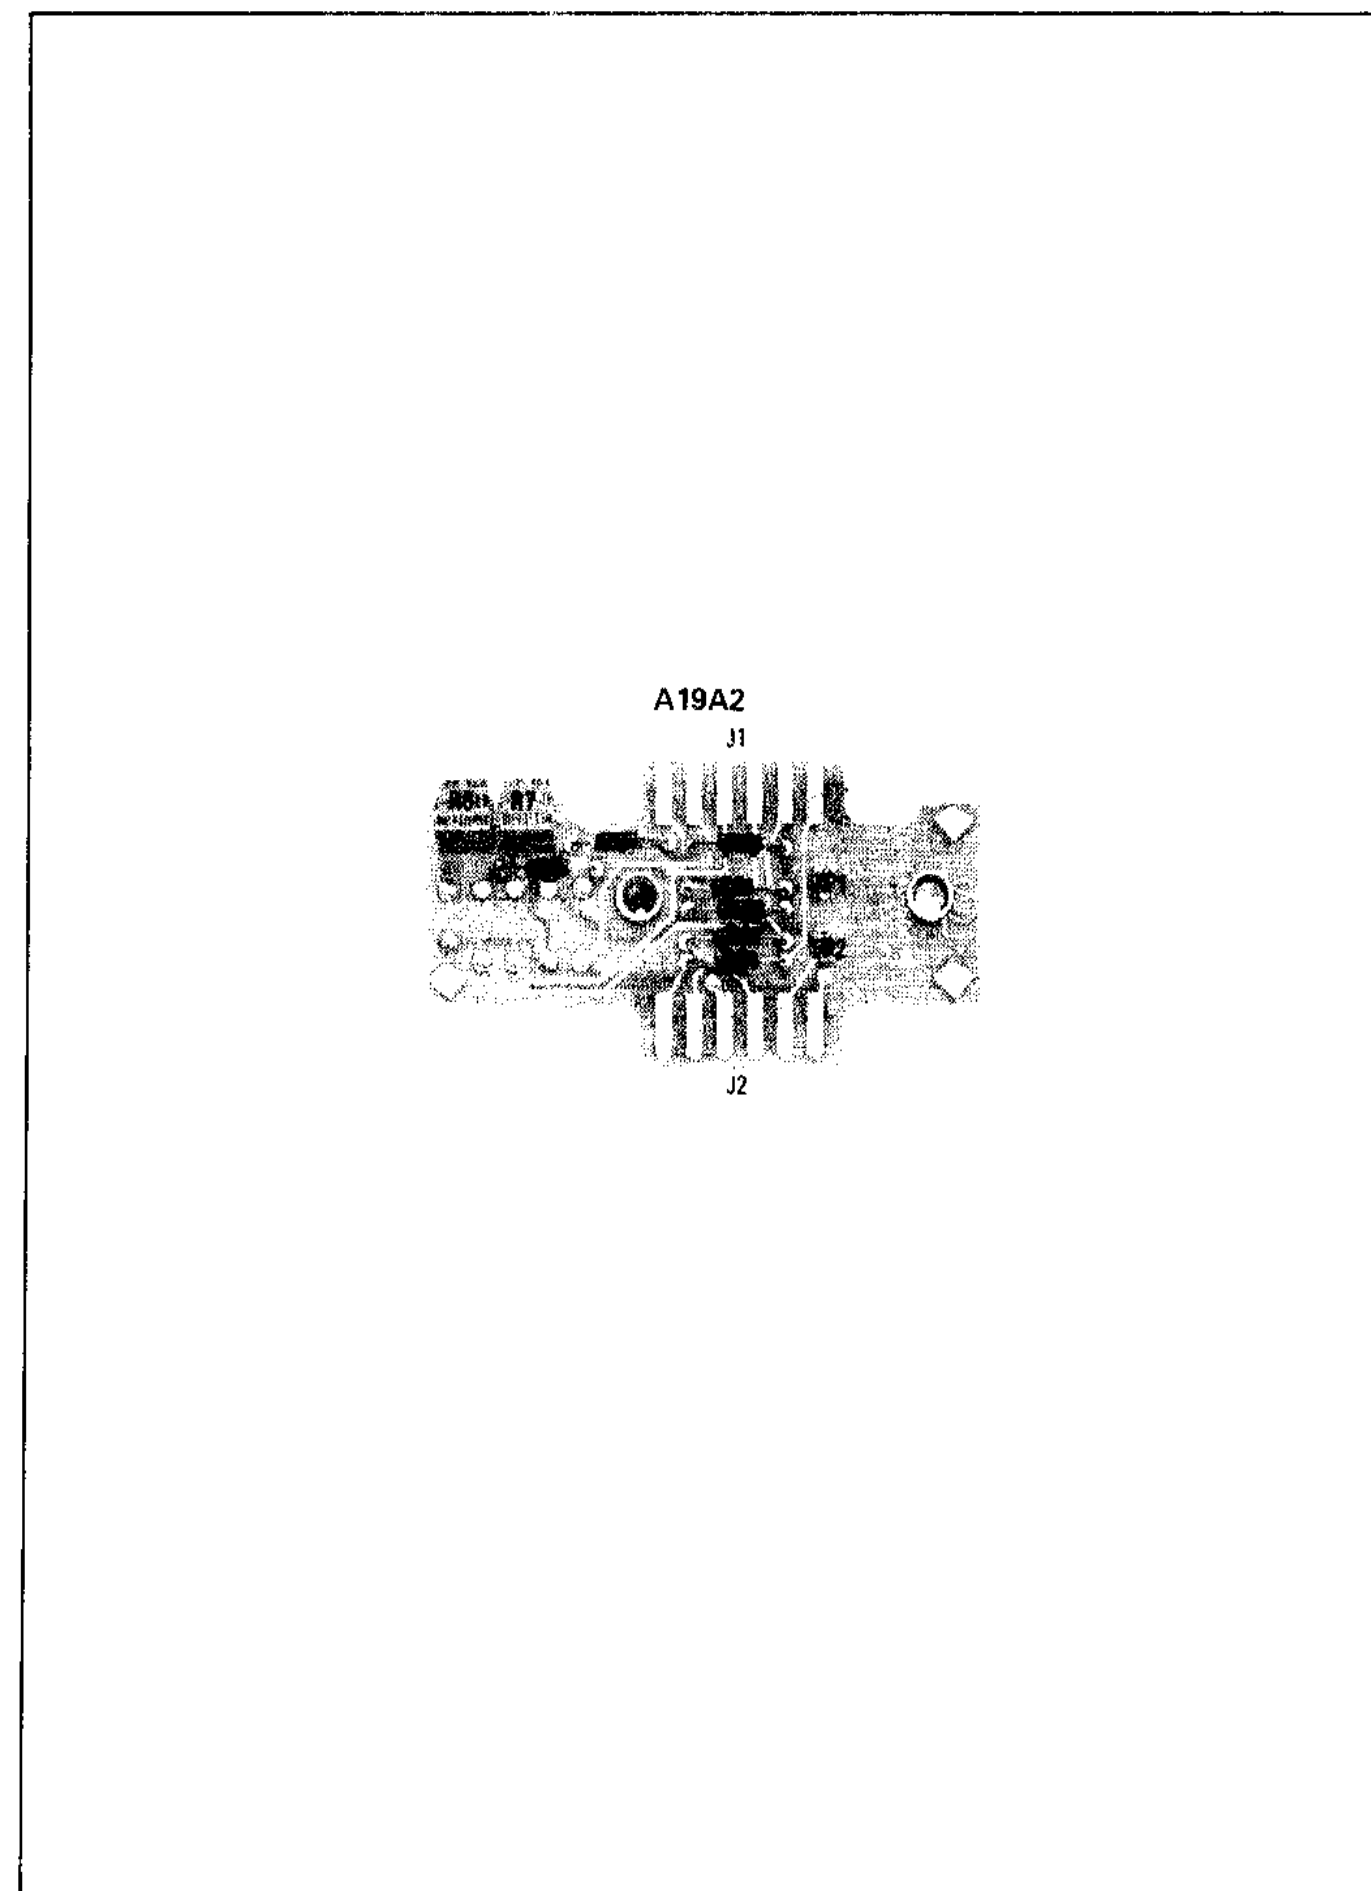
A19A2 RF Vernier Assembly Component Locations
